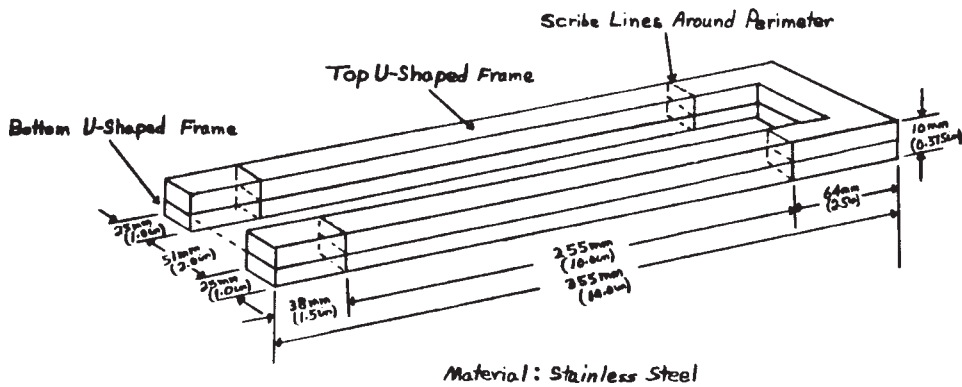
Typical Specimen Holder—Two Identical U-Shaped Frames
